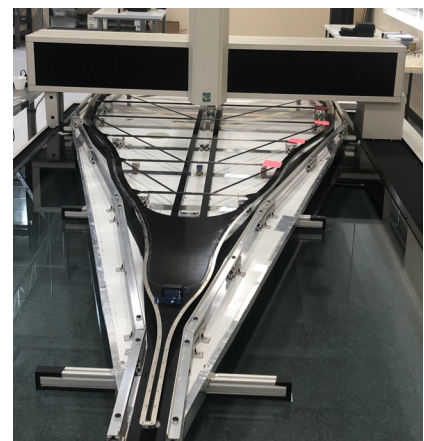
4-m long pathfinder petal installed on shape metrology tool
